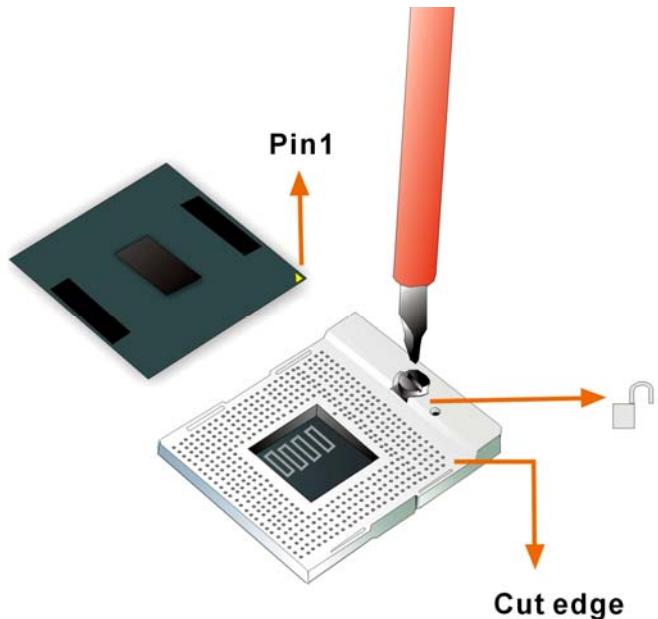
Make sure the CPU socket retention screw is unlocked
